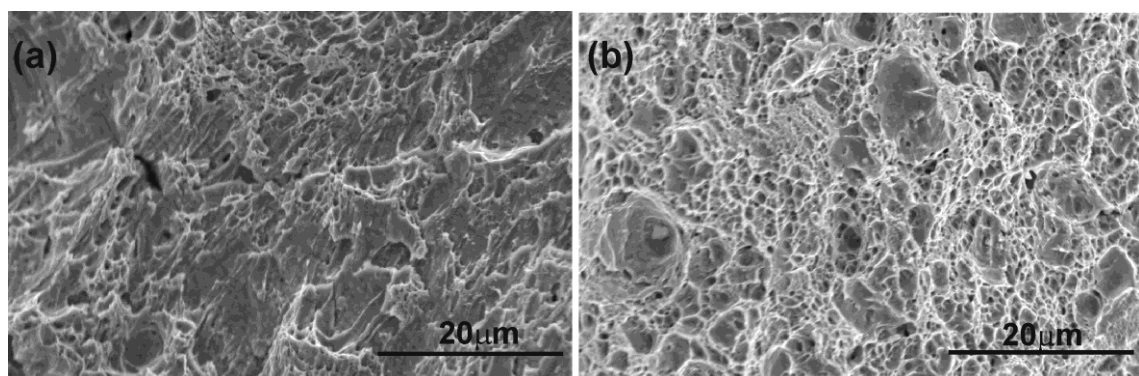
Fractographs of impact tested samples revealing ductile fracture for PWDT and PWNT conditions (a, b) respectively.
